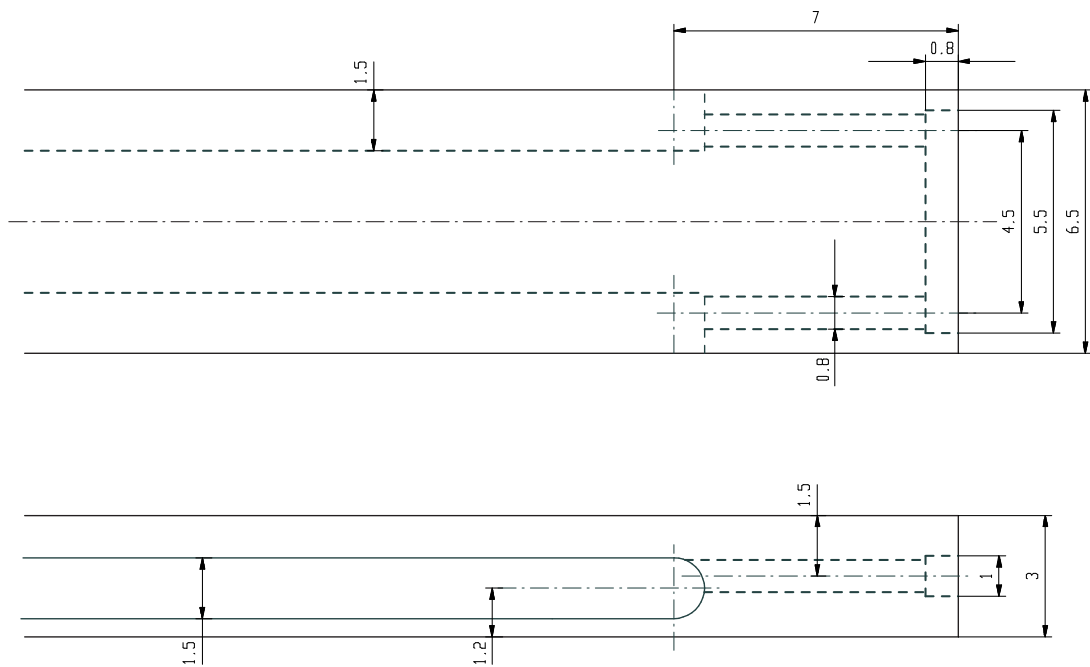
Detailed drawing of the rear side of the front part of the sample holder
